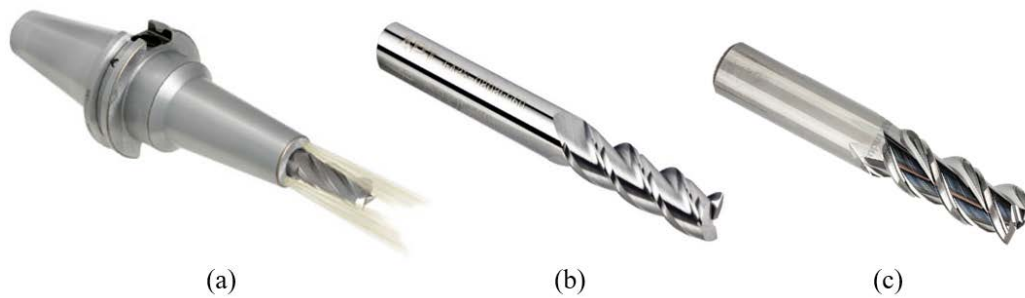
Tool holder and cutting tools selection (a) Shrink (b) D8 three-flute end mill (c) D16 four-flute end mill
